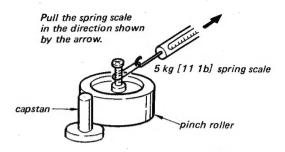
Pinch roller pressure adjustment (2)
